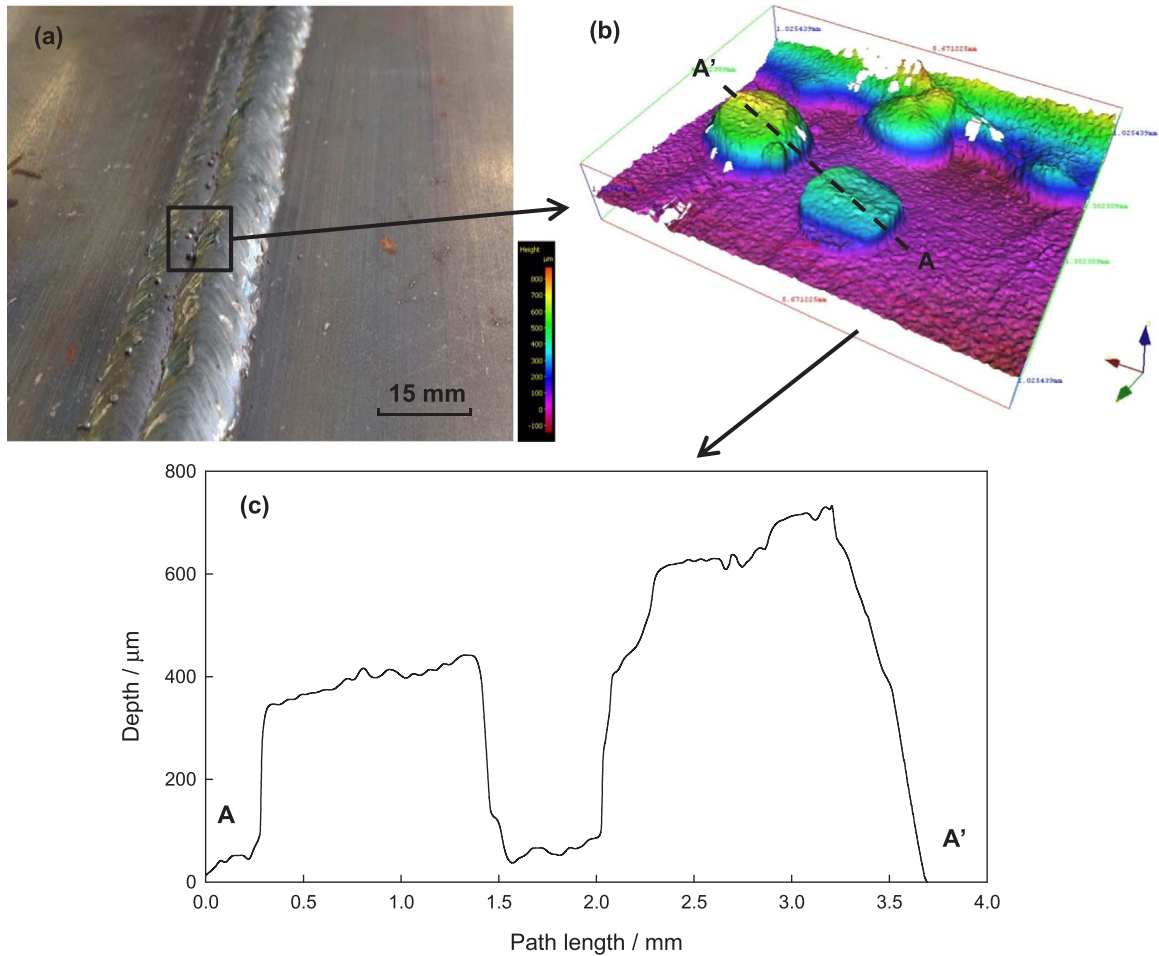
Imperfections on the butt welds of a shipping grade steel plate: (a) welded plate sample; (b) three-dimensional surface profilometry (scan area: 5.7 mm \times 4.3 mm); and (c) profile between A-A'.
